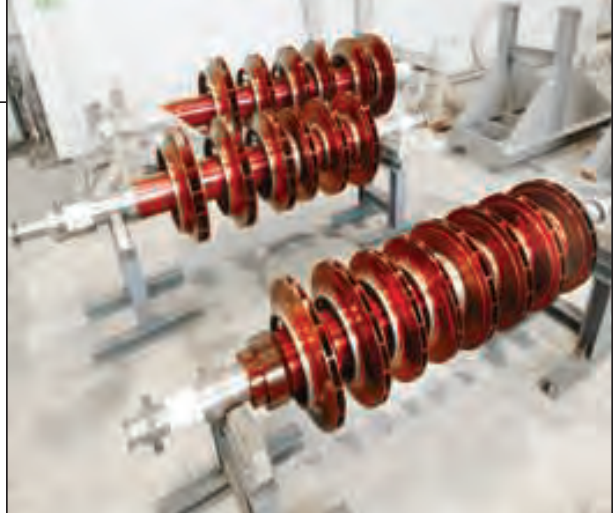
Shown here are examples of centrifugal compressor impeller assemblies (rotor assemblies) ready for shop balancing
